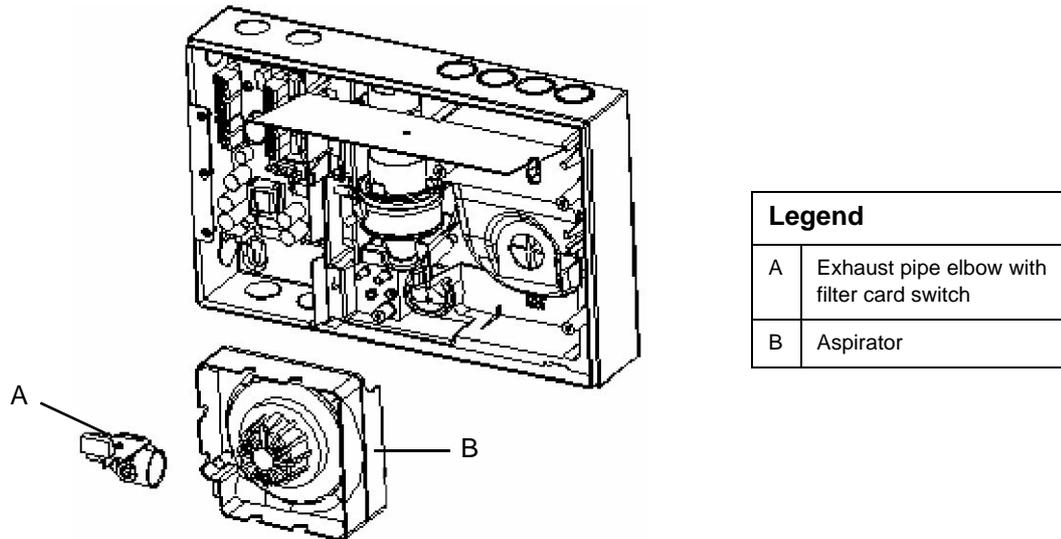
Removing Exhaust Pipe Elbow and Aspirator
